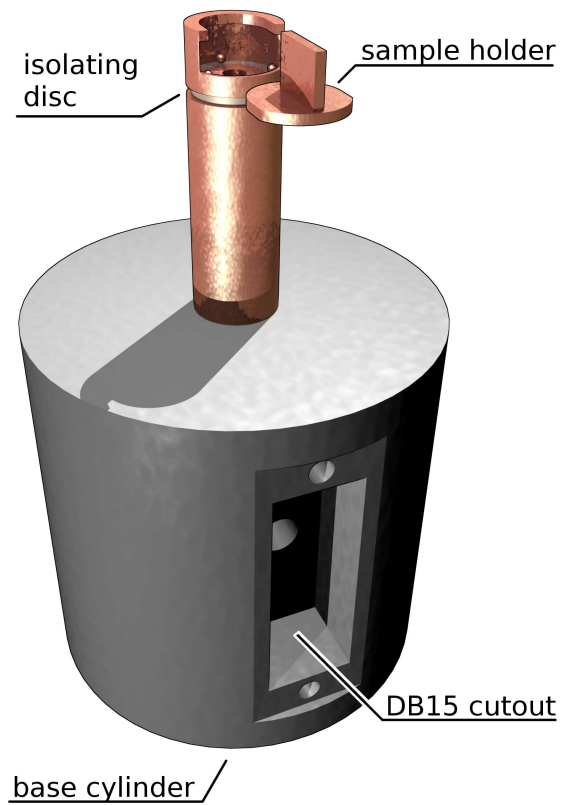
Scanner housing showing the base aluminium cylinder with the DB15 connector cutout. On the opposite side (away from viewing direction), there are two SMC coaxial outputs connected to the tip and sample side of the STM respectively. The insulating disc sitting between the copper tower cylinder and the scanner's head structure is shown in a pale color and can be seen as a score around the tower cylinder. On the right the sample holder is shown hovering at the height at which it would be inserted into the scanner head.
